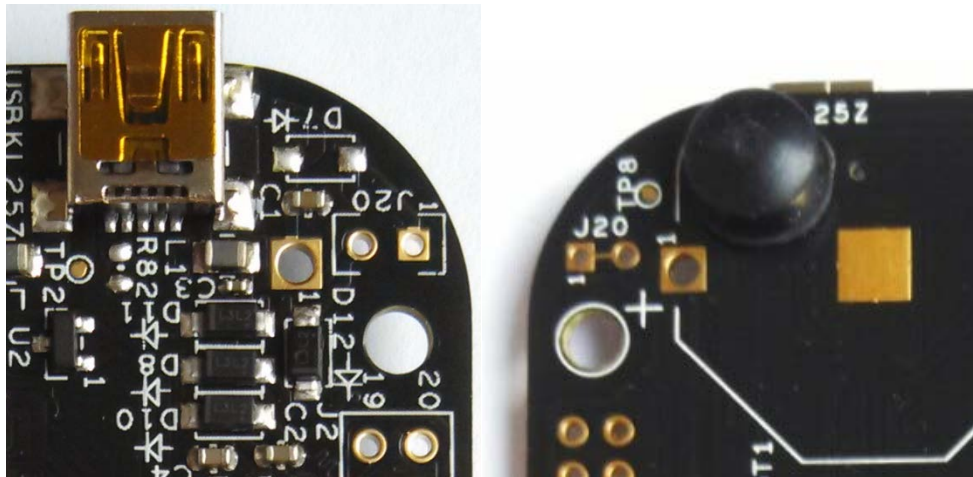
Detail of protection diode D12 and jumper J20 on PCB (left: PCB top, right: PCB bottom)
